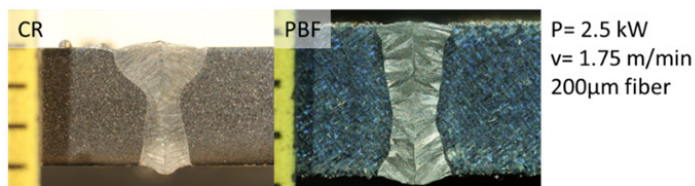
Different weld shapes in CR= cold rolled 316L stainless steel and PBF= powder bed fusion 316L stainless steel. Both welds made with same parameters.
